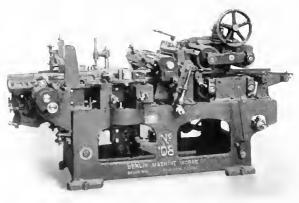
Berlin, No. 108, Open-Side Molder. Built 10, 12 and 15 in. Wide. Opening 8 in.
